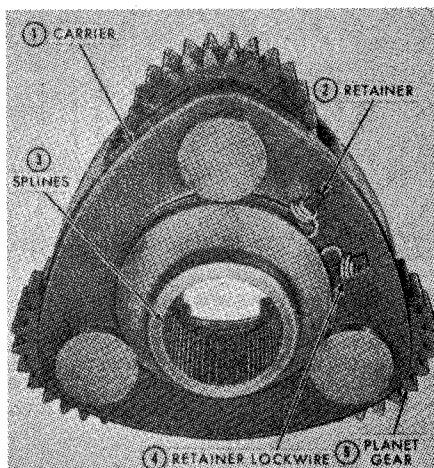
Planet gear shaft retainer is held in place with lockwire inserted under the retainer and secured by wrapping ends of wire around ends of retainer ring as shown. TW-30 models are equipped with four planetary gears; other models have three gears.
